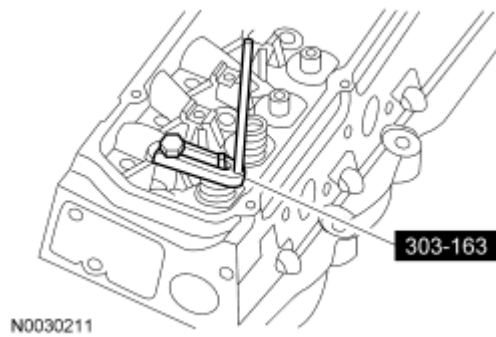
Compressing Valve Spring Using Special Tool (303--163)
